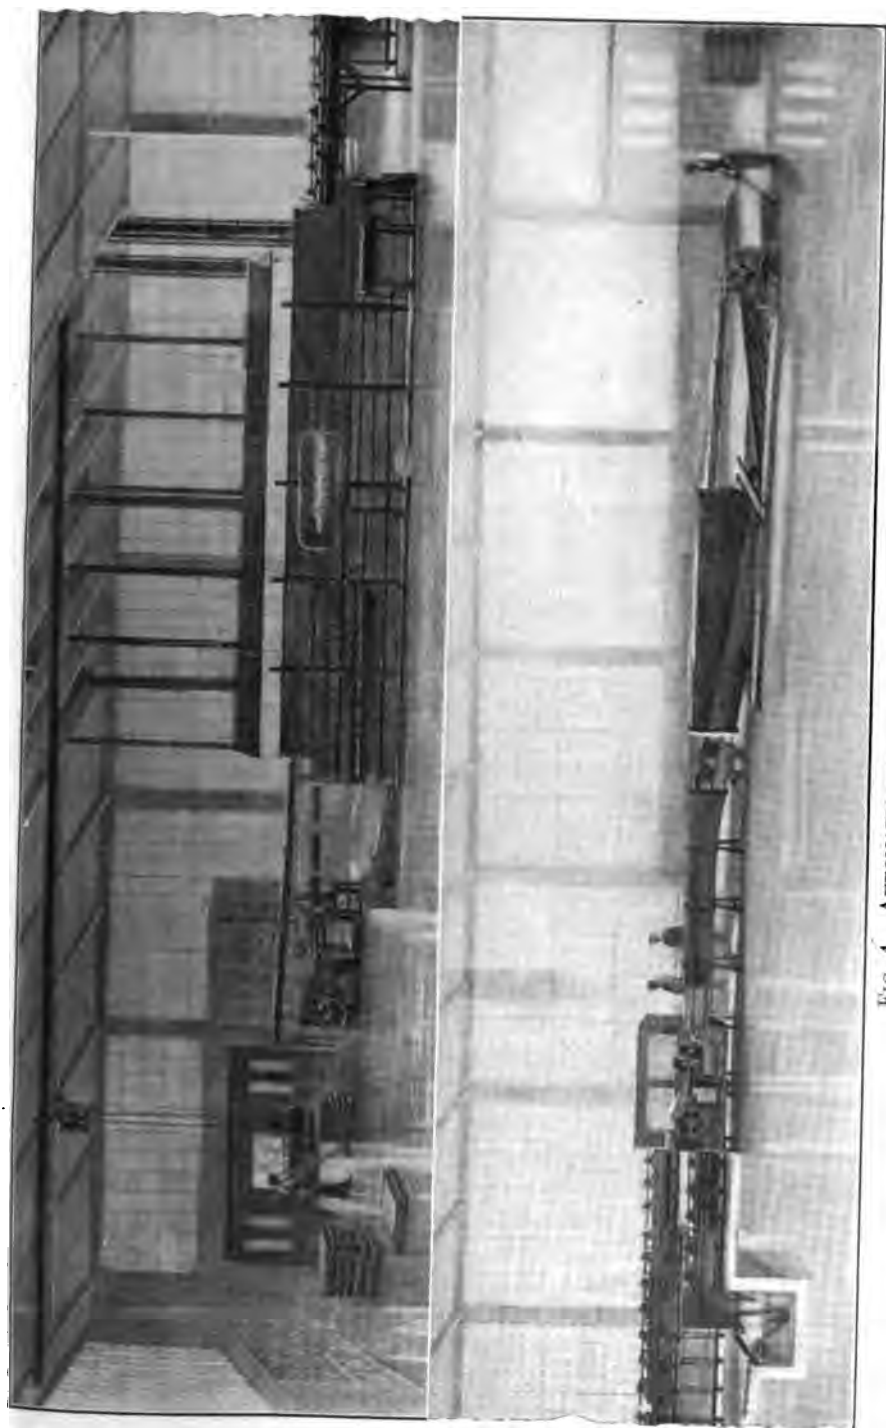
AUTOMATIC FEEDING AND PLATING MACHINE.
